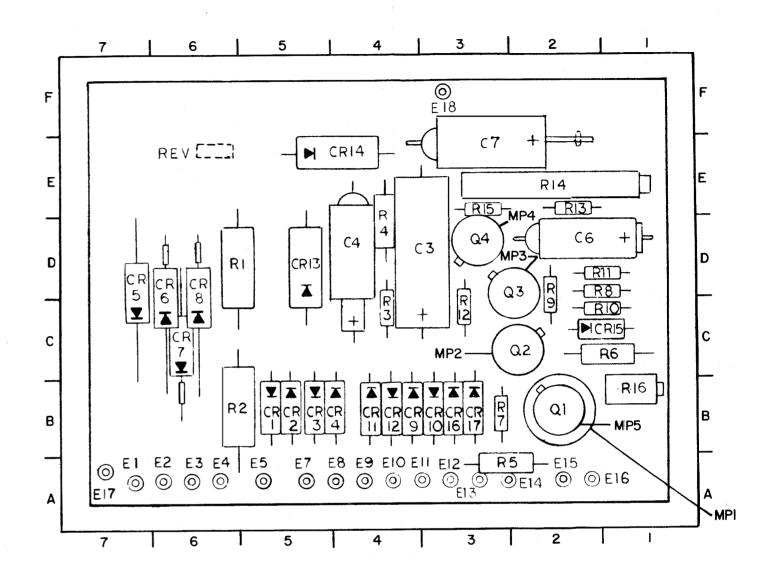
Power Supply Assembly A2A8, Component Locations
